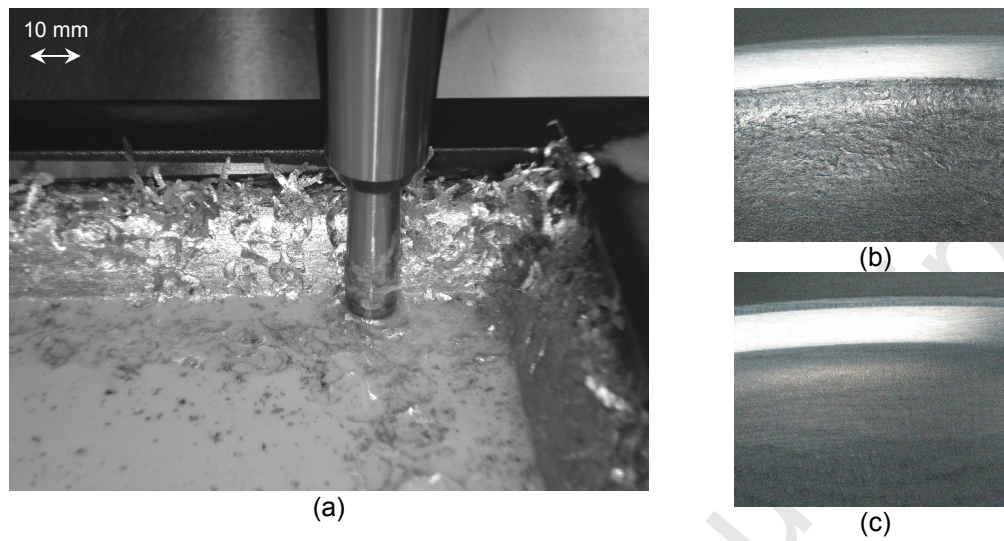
SPIF of an Aluminium AA1050-H111 conventional sheet metal blank with 1.5 mm thickness.
